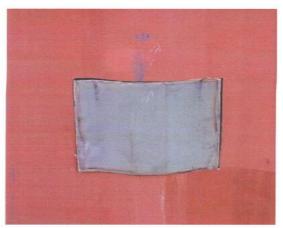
/ Panel insert fitted into place (before welding)
